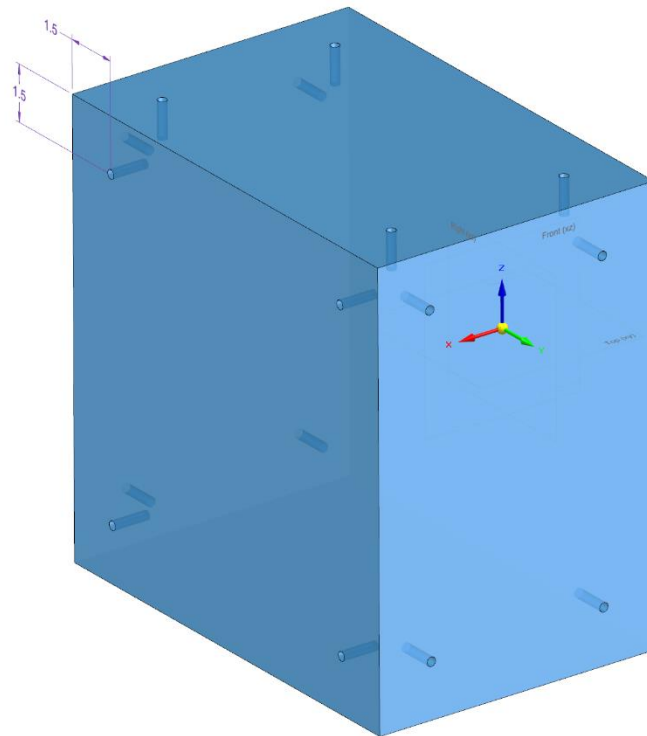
Suggested tooling ball socket locations, X = Beam, 1.5" in from edge typical
